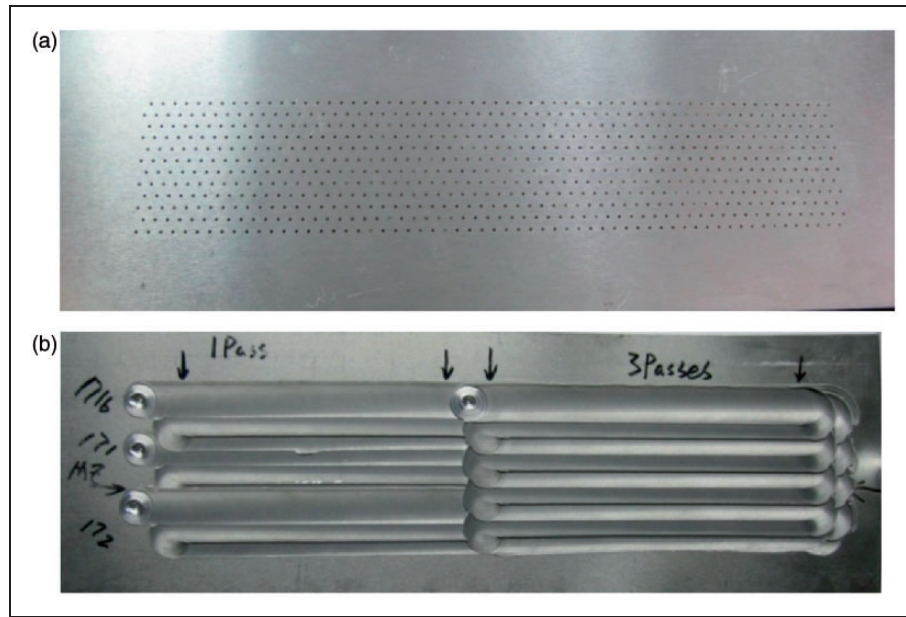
(a) AA6061-T6 plate with an array of 720 holes with 1 mm diameter, 1 mm in depth, and spacing of 4.2 mm; (b) AA6061-T6 plate after FSP.
